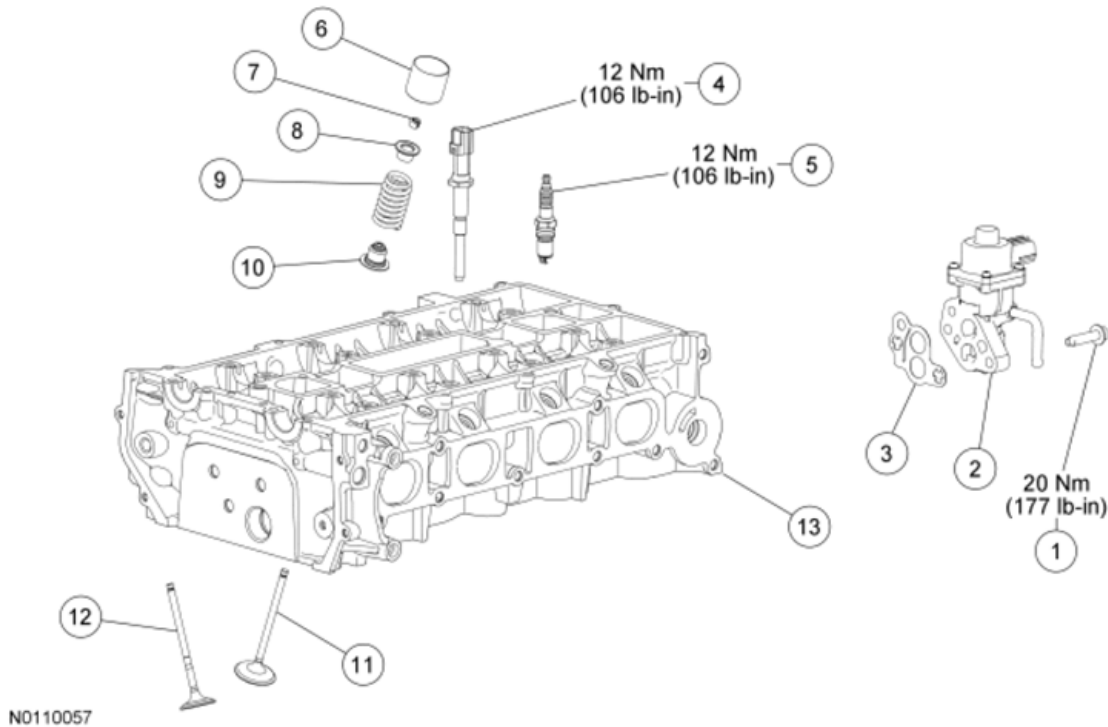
Identifying EGR Valve, Spark Plugs, Cylinder Head Temperature (CHT) Sensor And Valves With Torque Specifications
